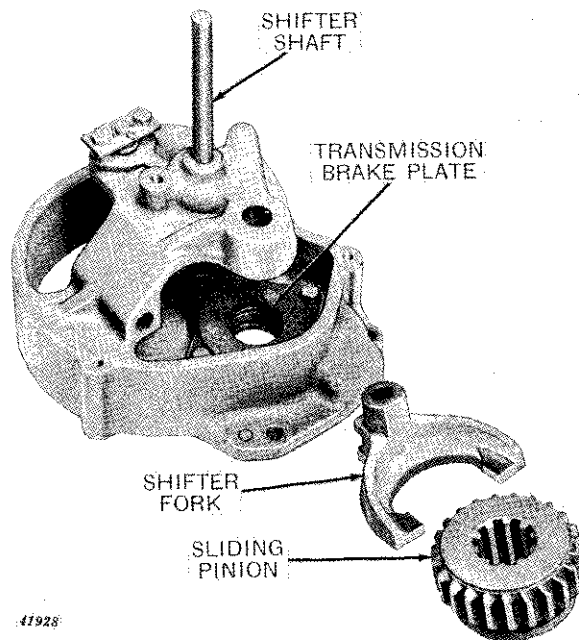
Transmission, Brake Plate, Shifter Fork, and Pinion
